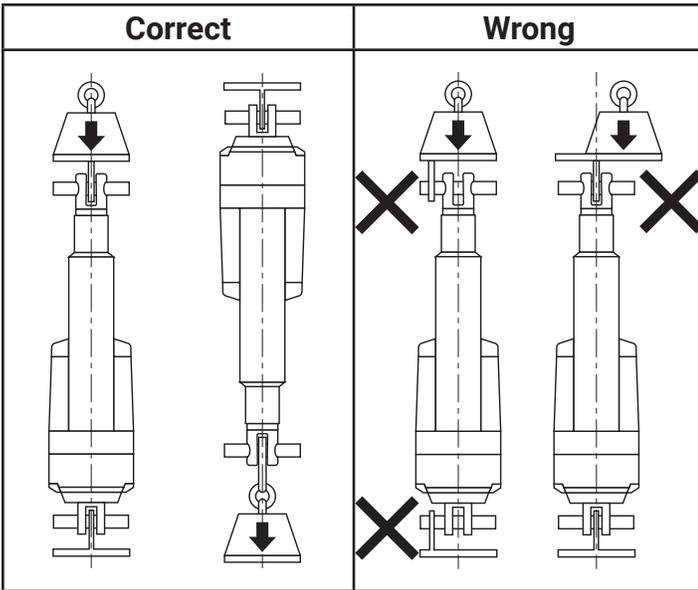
Off Center or Side Loads May Cause Bending
